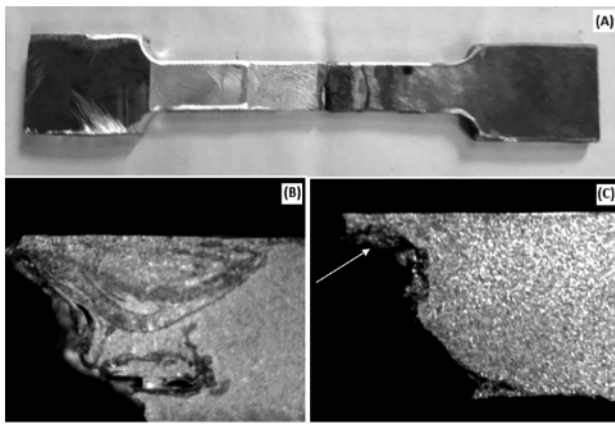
a) ASTM tensile specimen, b) brittle fracture on the advancing side, c) fracture on the retreating side
